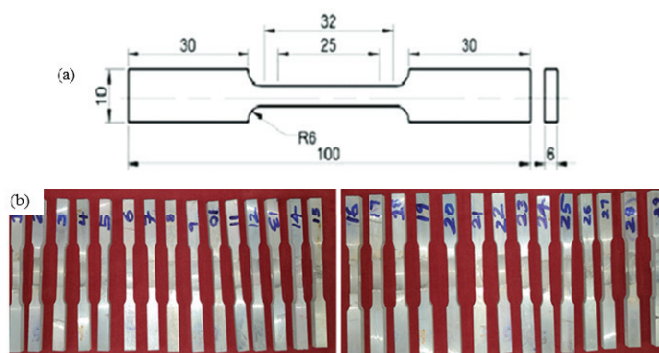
Tensile strength; a) test specimen dimension; b) dog bone test specimens.
